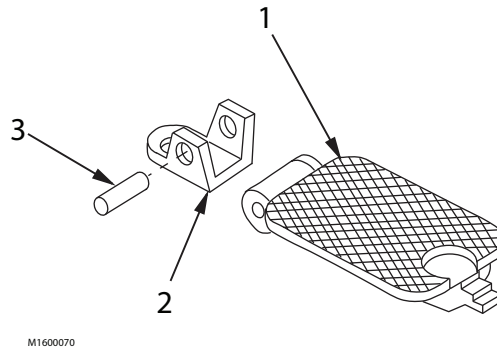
Assembly of Buttstock Door Assembly (Rifle).
